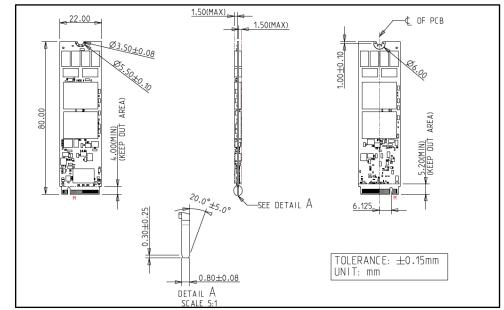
Innodisk M.2 (P80) 4IE2 mechanical drawing
